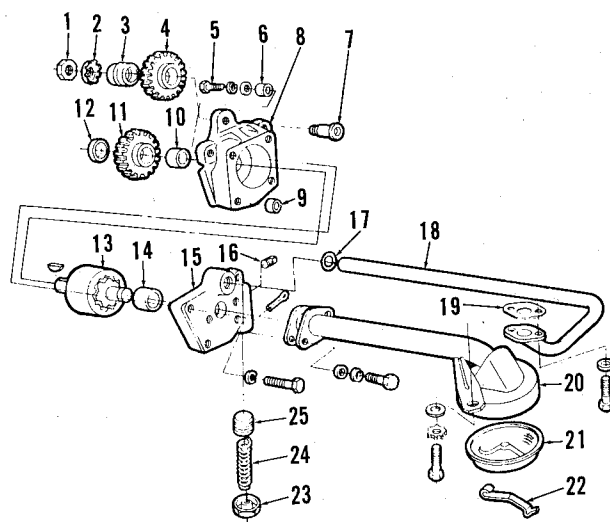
A—Front view of oil pump assembly used on TW-10, TW-20 and TW-30 model tractors.
